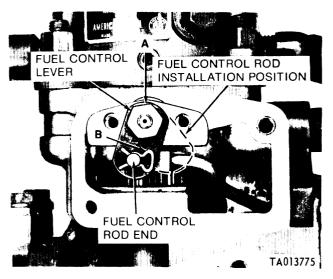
Installing fuel control unit assembly on metering and distributing fuel injection pump.
